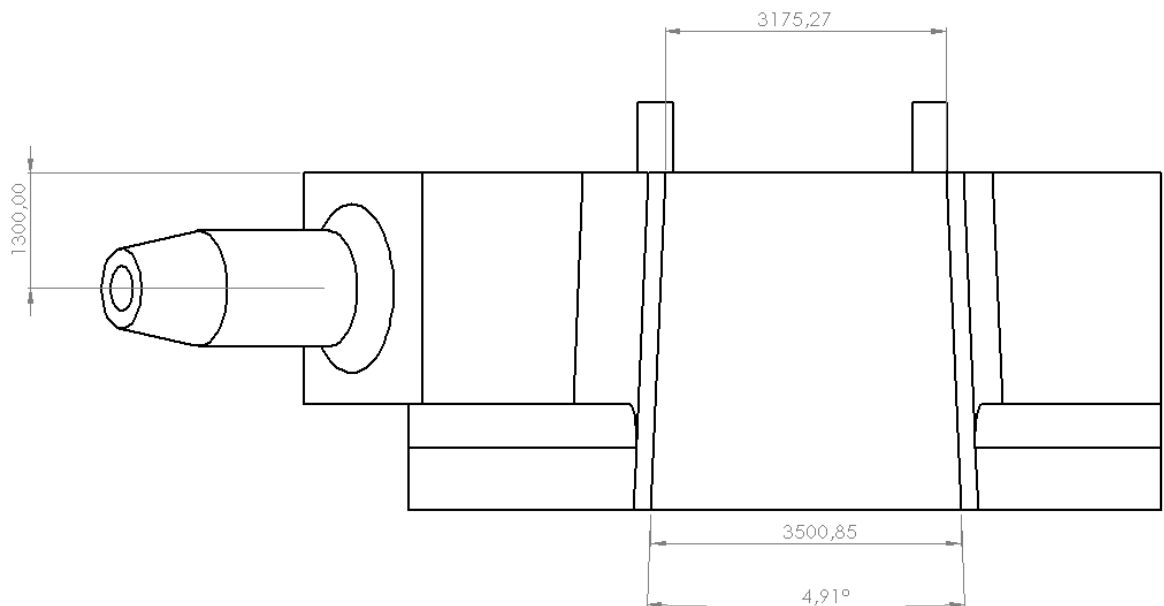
Microfluidic interface drawing, bottom view. Dimensions in micrometres [μm].
